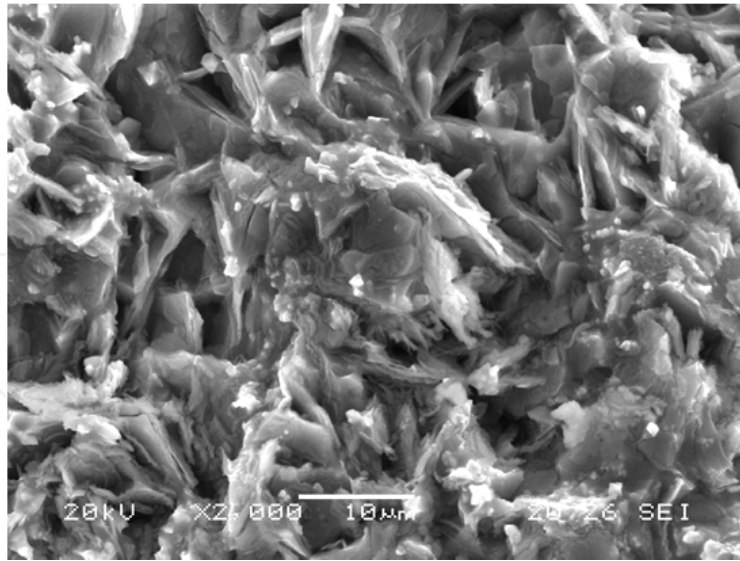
Fractograph of the laser welded joint without Ti filler
